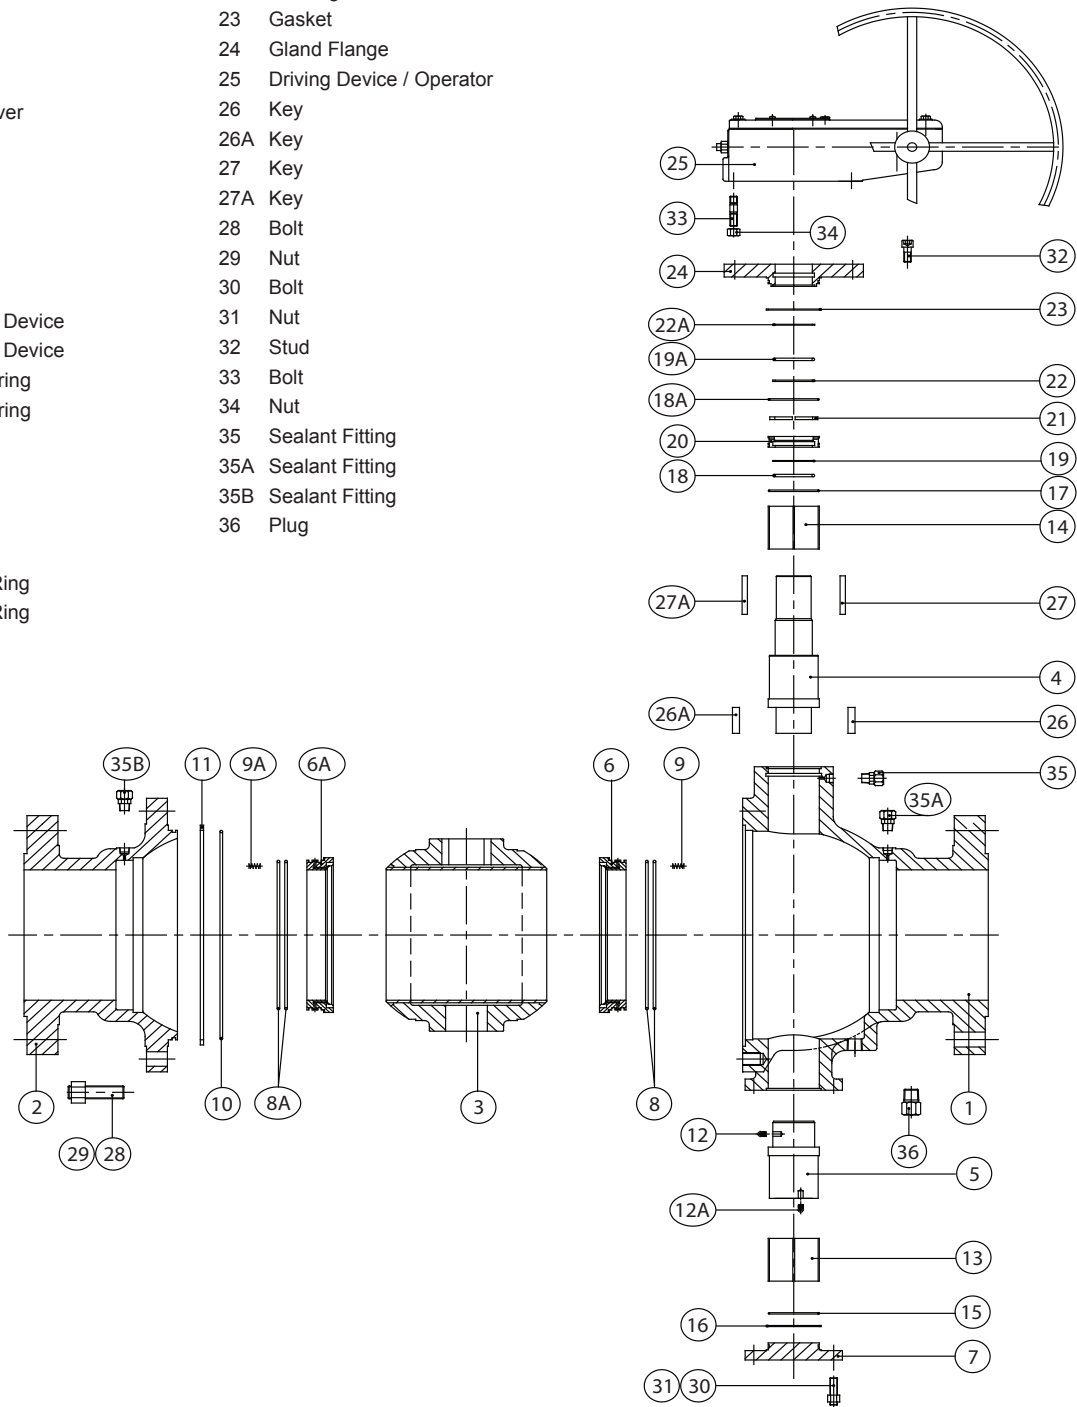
Tartarini™ Trunnion Mounted Ball Valve Assembly
